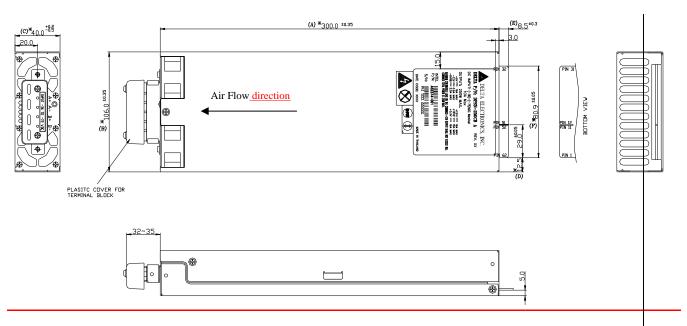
Power Subsystem Enclosure Outline Drawing
